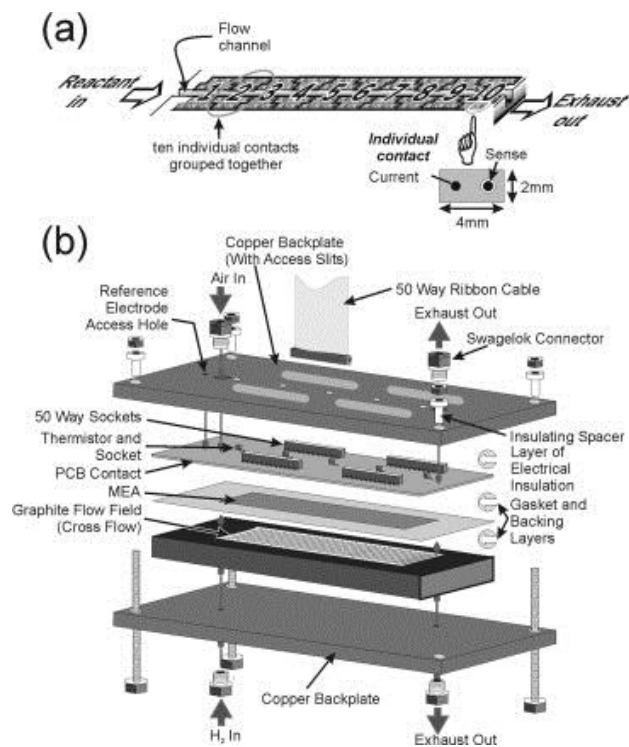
(a) Diagram of PCB contact electrode geometry for single channel flow field. (b) Exploded view of fuel cell [60].
